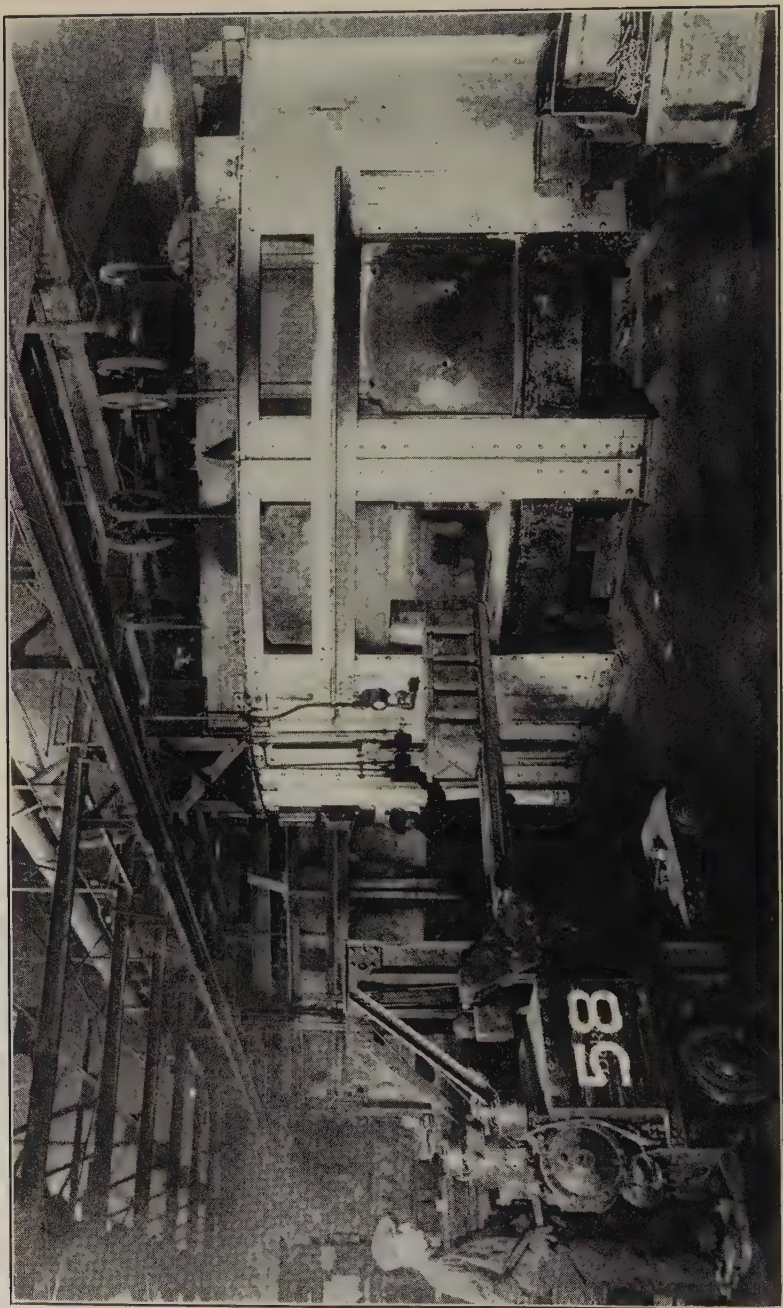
A Large Carburizing Furnace Being Loaded.—Courtesy Geo. J. Hagan Company.
